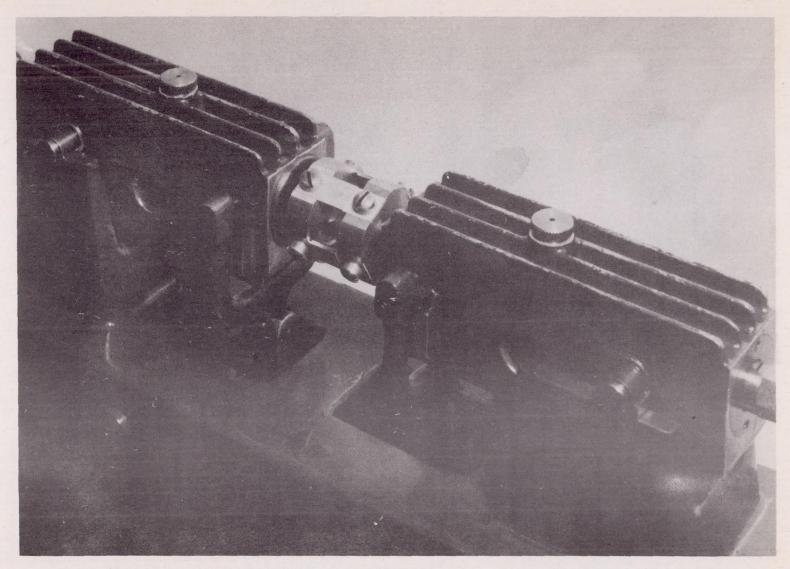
Fatigue tests of spot-welded joints in a sheet 0.032 inch thick.
